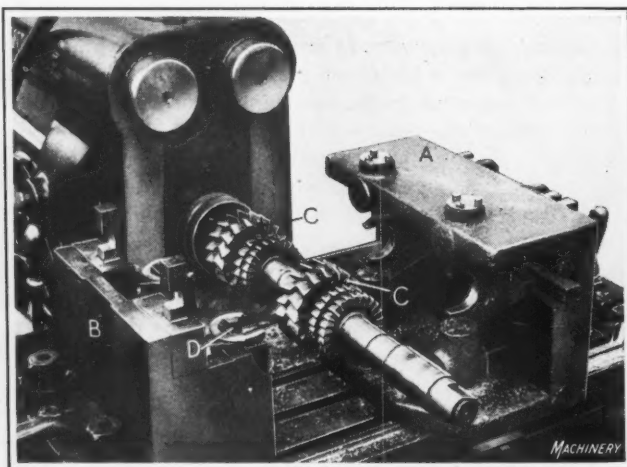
Tooling employed for milling the Sides of the Fork and the Straight Sides of the Throat
